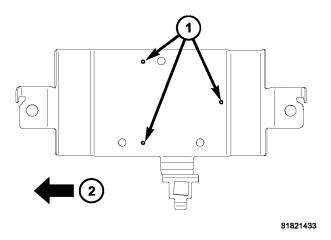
REVISED SDAR MOUNTING HOLE LOCATIONS
